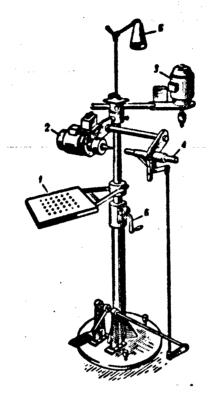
General-purpose machine tool for machining various plastic components: 1) Bench; 2) electric motor; 3) electric motor with chuck for drilling; 4) pressure roller; 5) lamp; 6) foot pedal.
